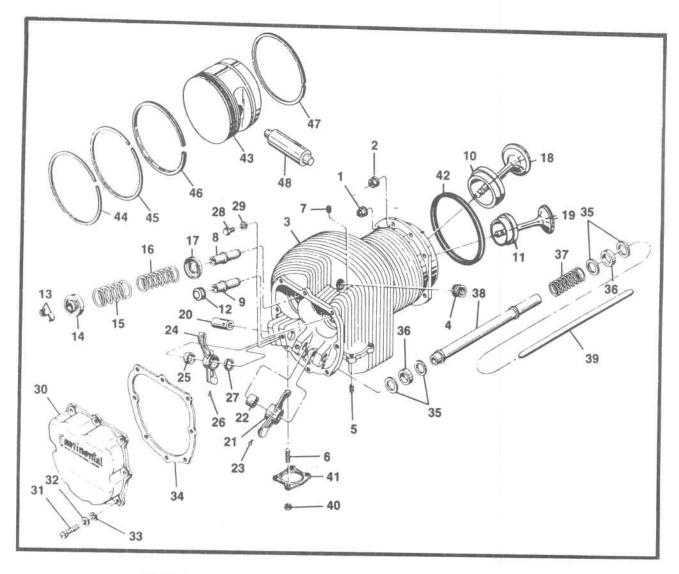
A. CYLINDER ASSEMBLY (INCLINED VALVE) ALL EXCEPT IO-470-J & K
